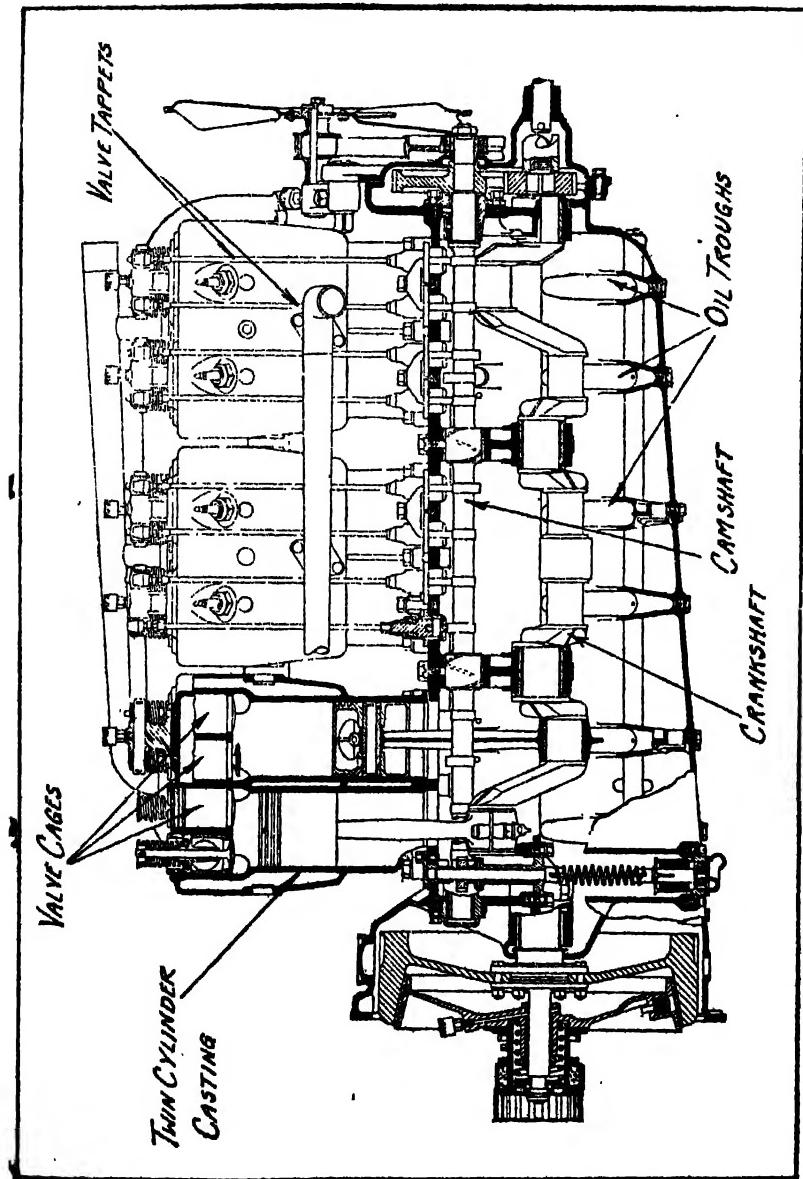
Part Sectional View of Six Cylinder Buick Motor, Showing Method of Valve Mounting in Easily
